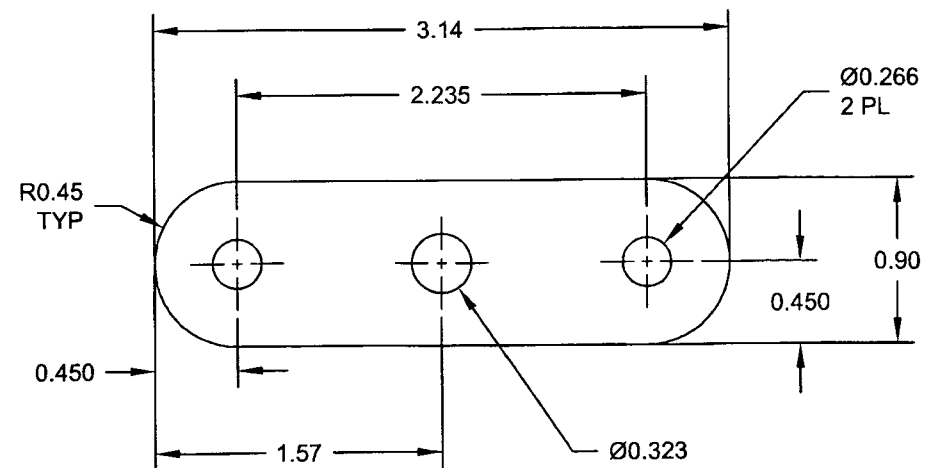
DETAIL D: HOOP & HINGE PLATE DETAIL
